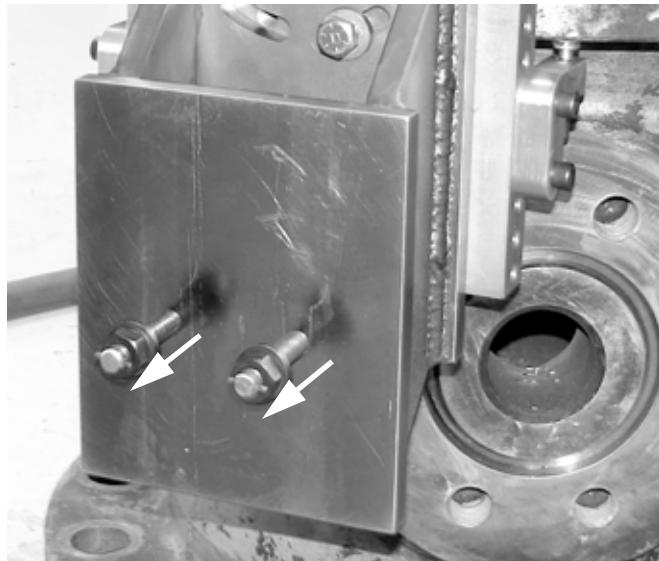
Screw the nuts out to the ends of the drill mounting bolts.
